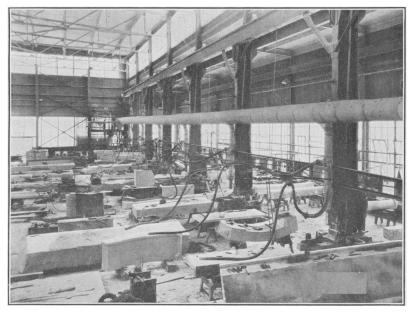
Devices used to remove dust from hand pneumatic tool work, Plant Y
